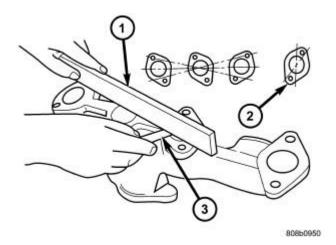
Checking Surface Flatness Of Exhaust Manifold Courtesy of CHRYSLER LLC
